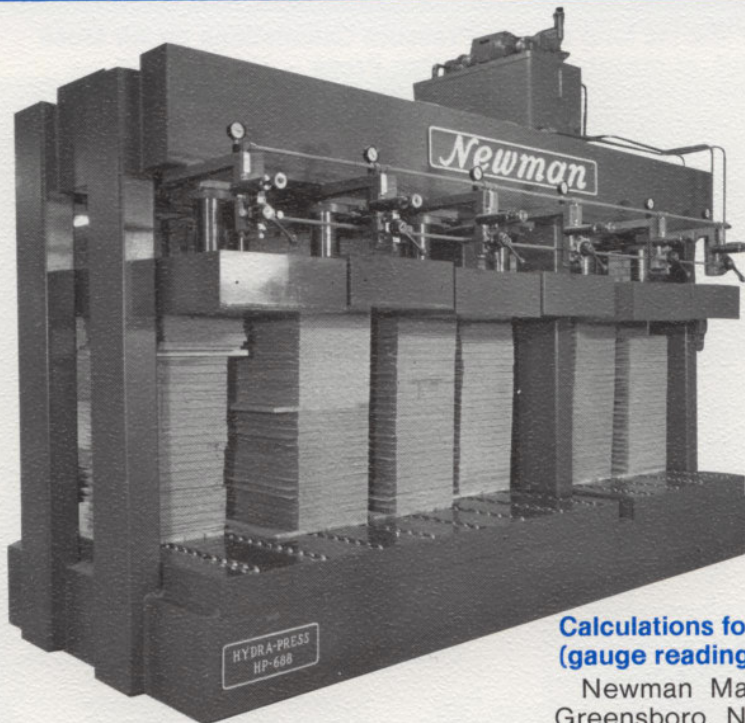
A 6-section side loading hydraulic press. (Photo courtesy of Newman Machine Co., Greensboro, N.C.)
